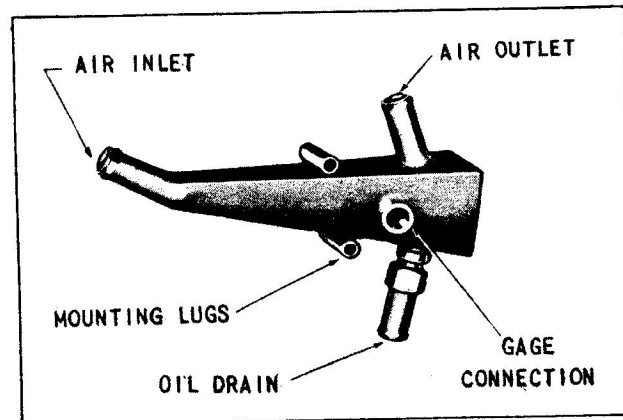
PESCO MODEL 3S-218-R OIL SEPARATOR
